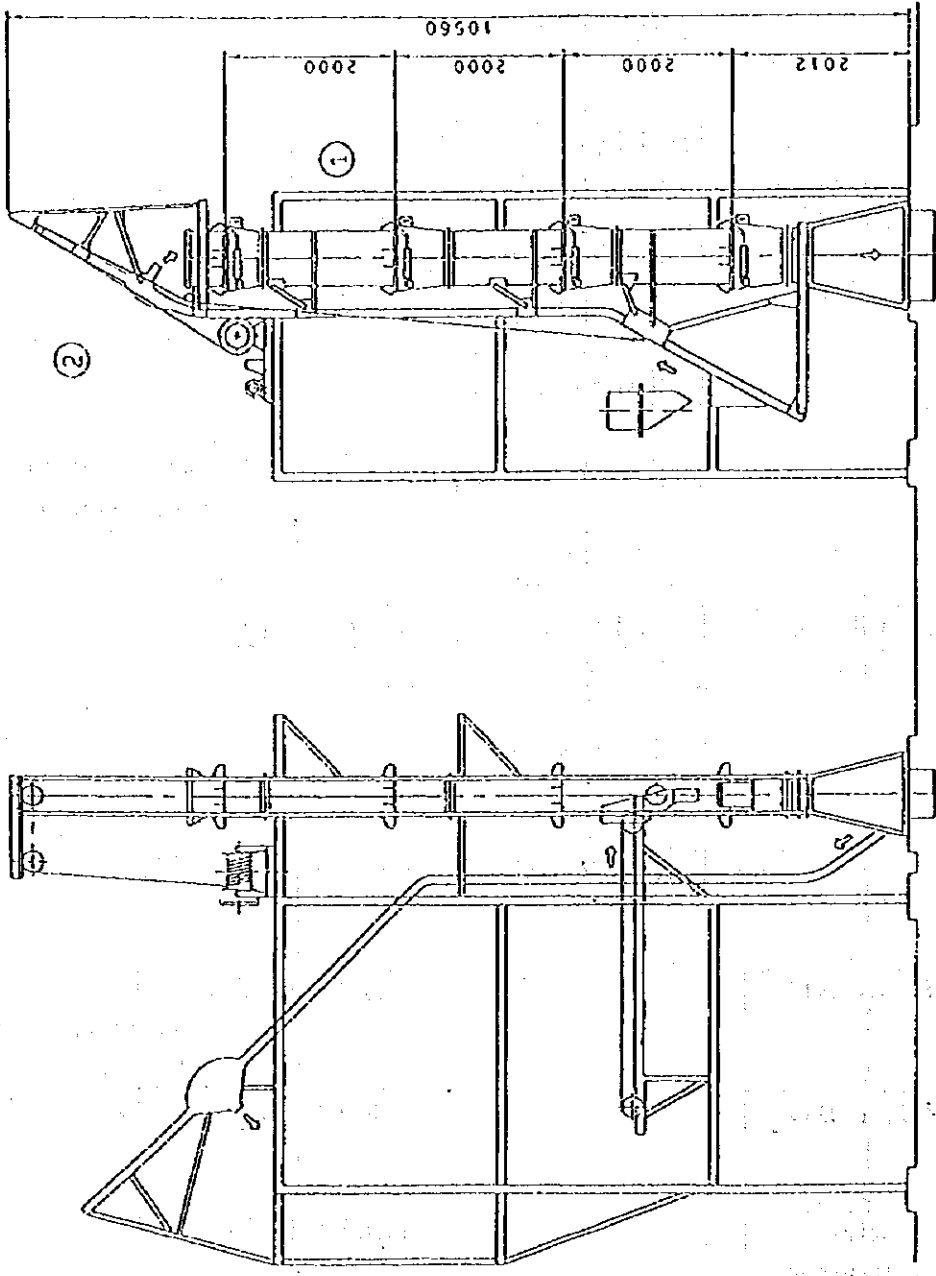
Typical drawing of shutter tester and skip elevator
